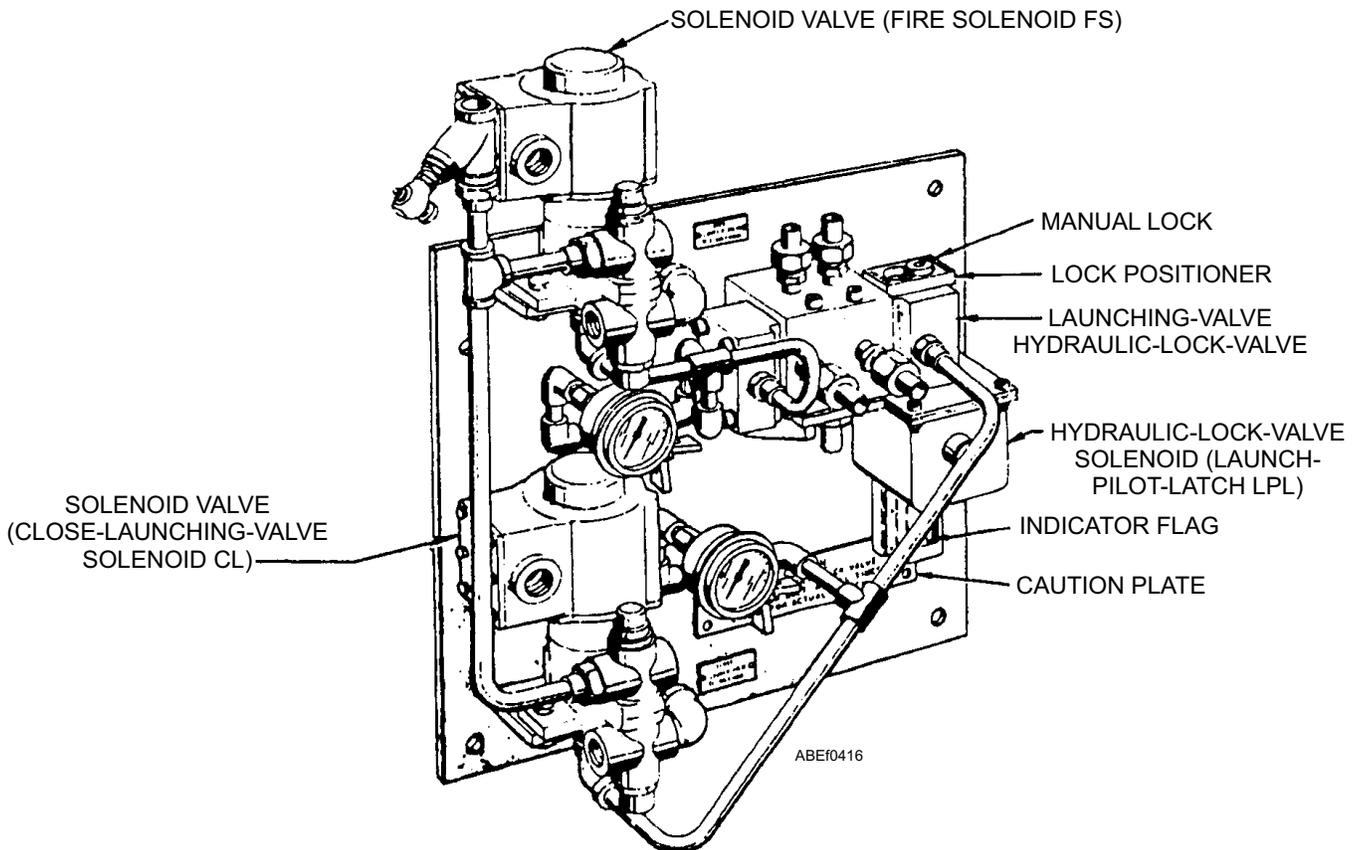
Launch-valve hydraulic-lock-valve panel.
